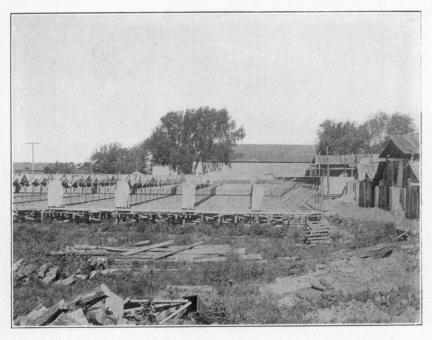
Drying racks at Whittet's brick yard, Edgerton. The bricks are dried on the racks, which can be covered by canvas screens to prevent rapid drying and cracking.
